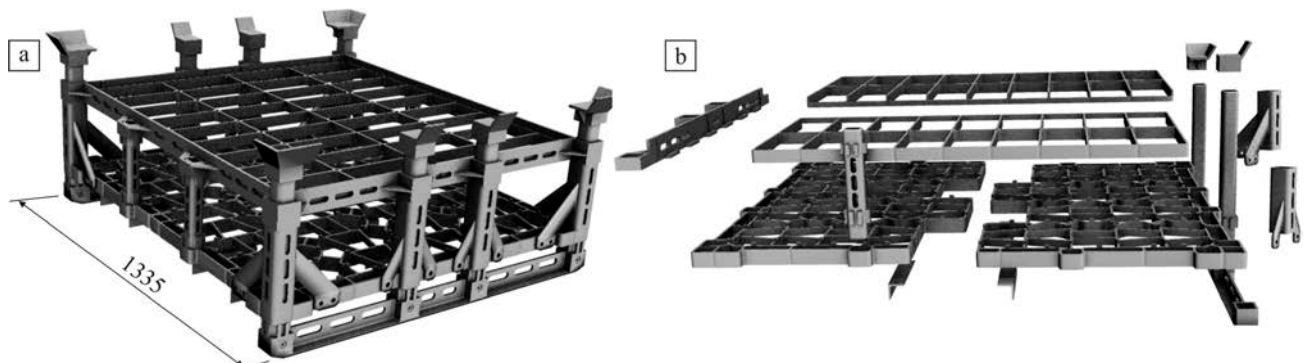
Modified design of basket shown in Figure 7 [3, 9]: a) general view, b) single components
